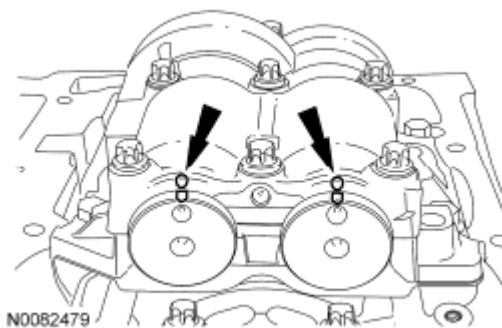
Locating Balancer Unit And Shafts Reference Mark
